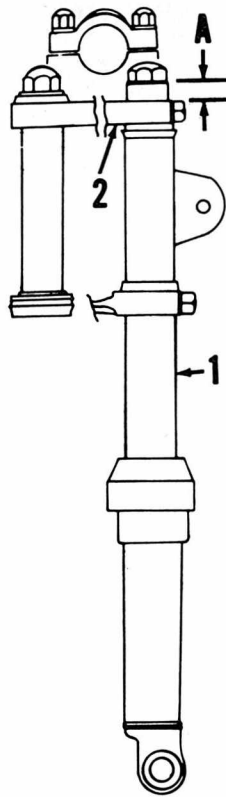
Distance (A) from top side of upper fork bracket (2) to top of inner fork tube (1) should be 12 MM on TS models.
